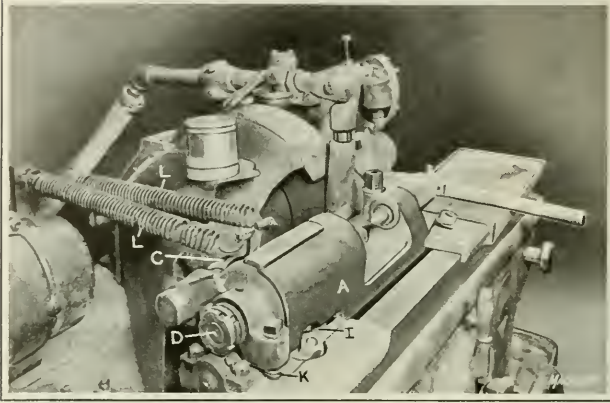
Special Attachment for grinding Clearance Space at the Outer End of each Wrist-pin Hole
